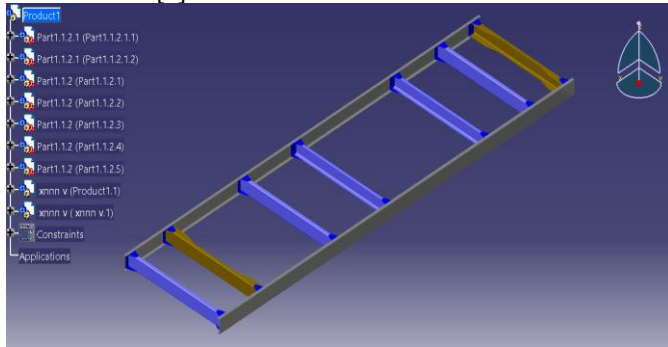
"C"-Section Chassis Frame Assemble on CATIA
